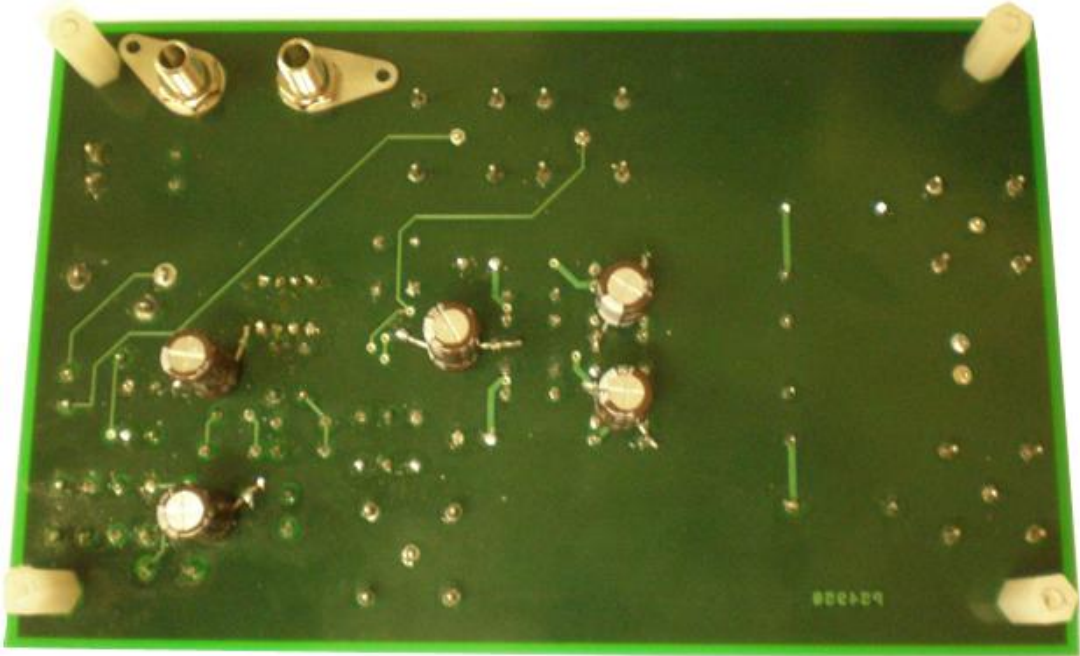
Two-level PCB Assembled with Bypass Capacitors (Bottom)
